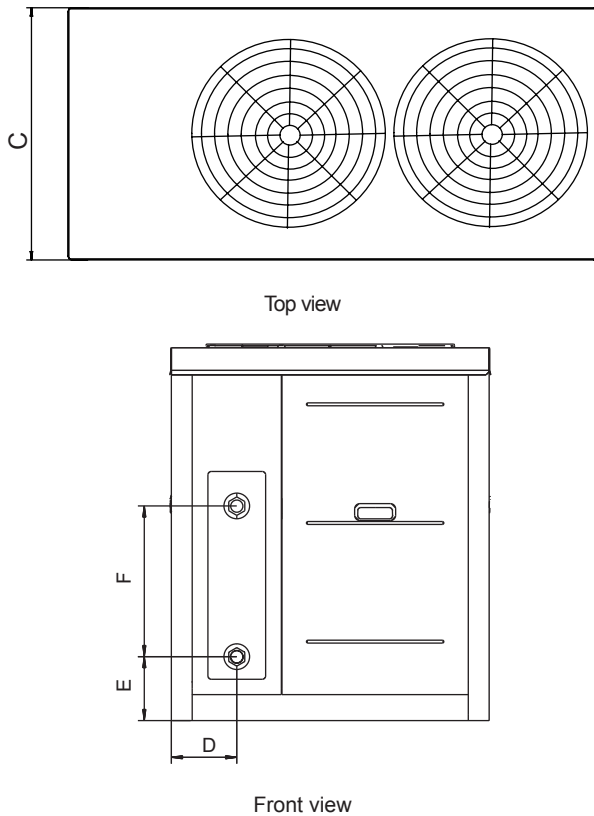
Outline dimensional of KEM-60 DNS3
